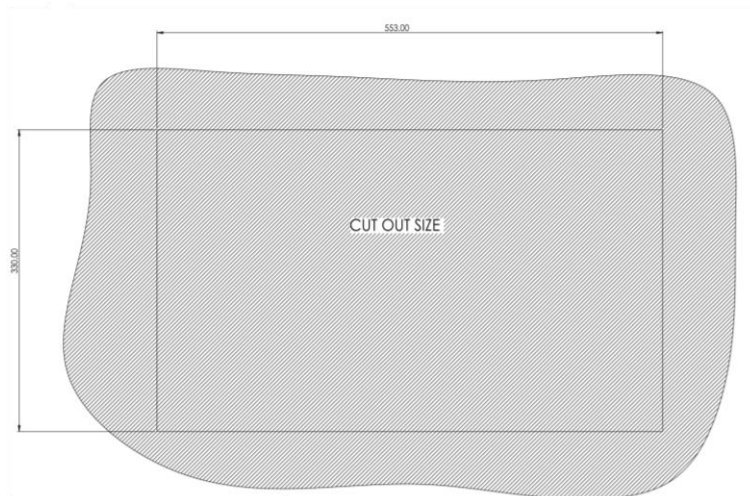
AURA-W238-RK3576 Panel Cutout Dimensions
